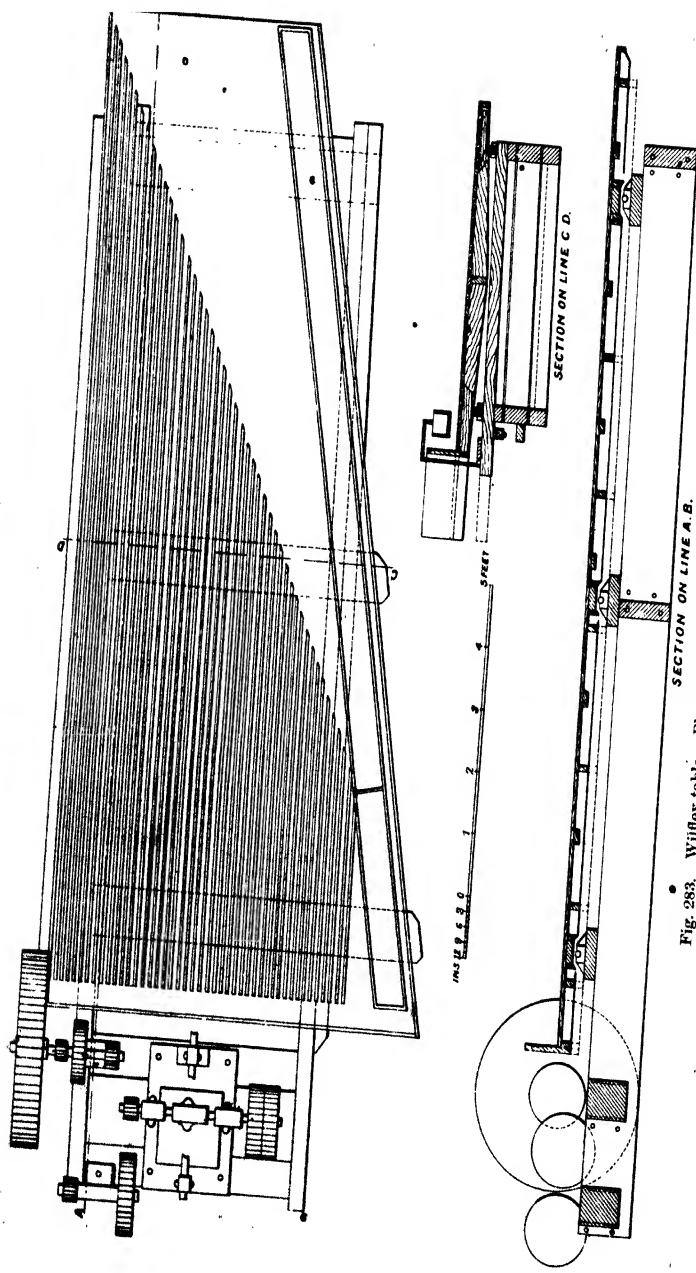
Wilfey table. Plan, longitudinal and transverse sections.
